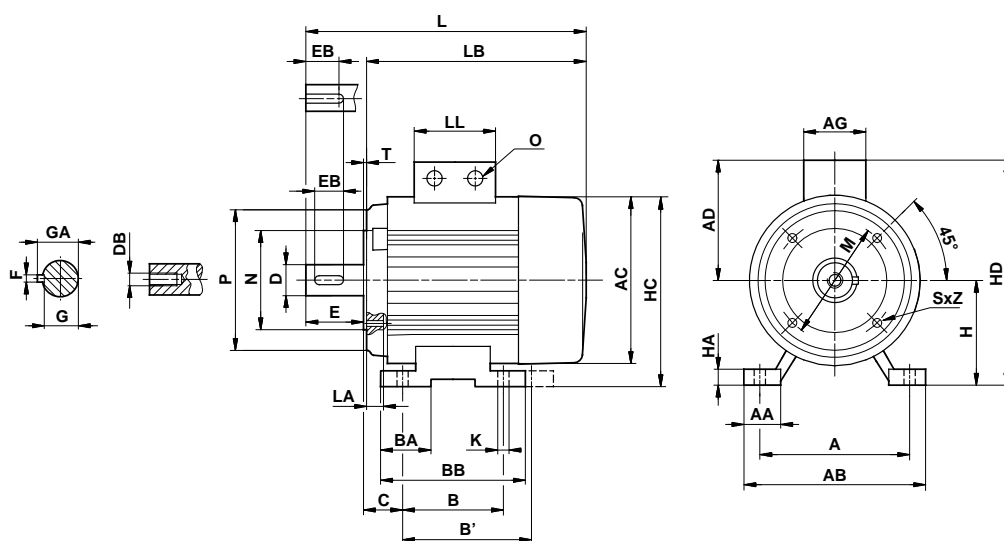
Foot-mounted motor with tapped-hole flange, IM B 34
